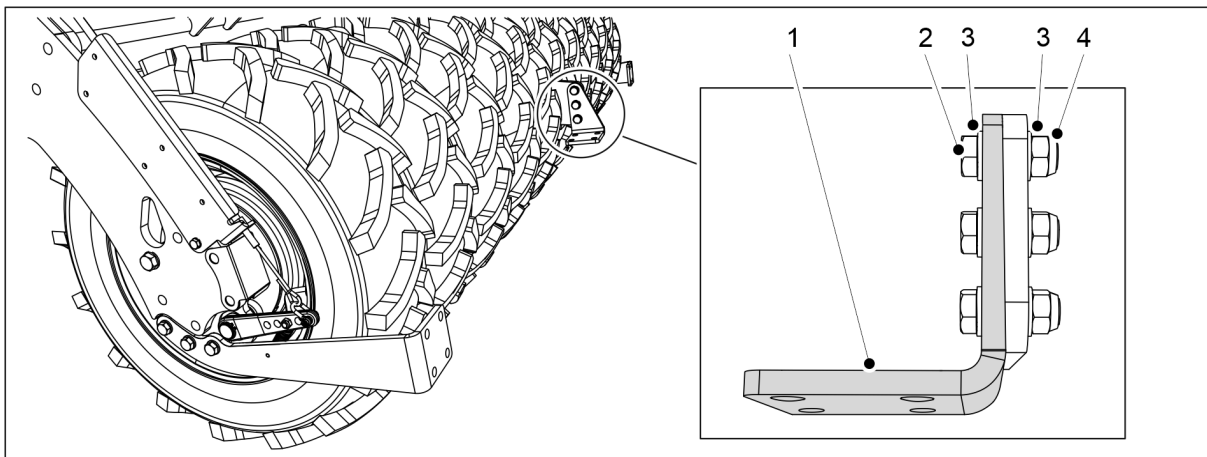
63. Mounting the scraper suspension plate
